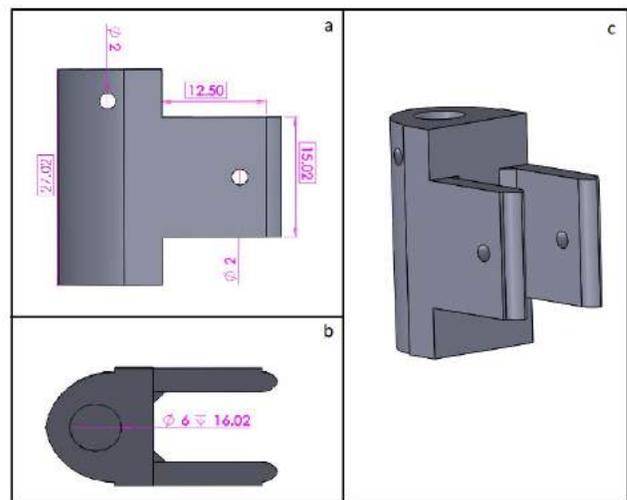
a) Front view of belt holder. b) Top view of belt holder. c) belt holder (all dimensions are in millimeters. Figure not to scale)
